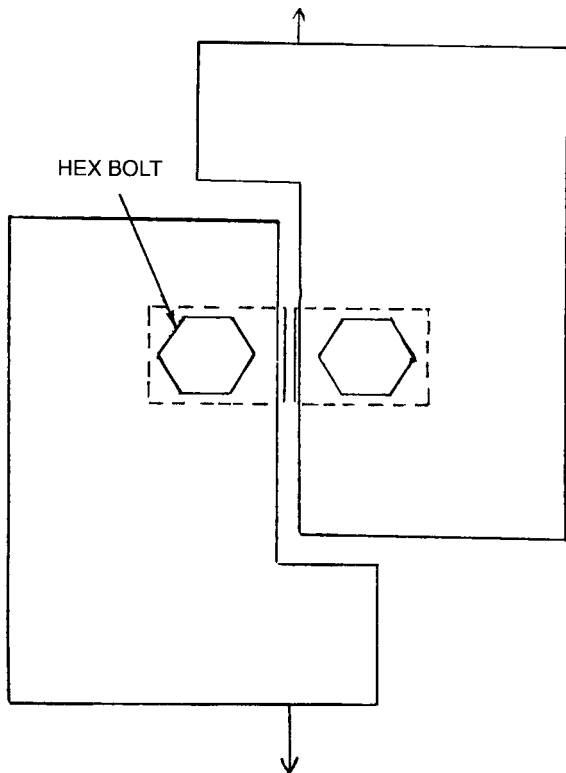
Drawing of the Recommended Shear Test Specimen Assembly
